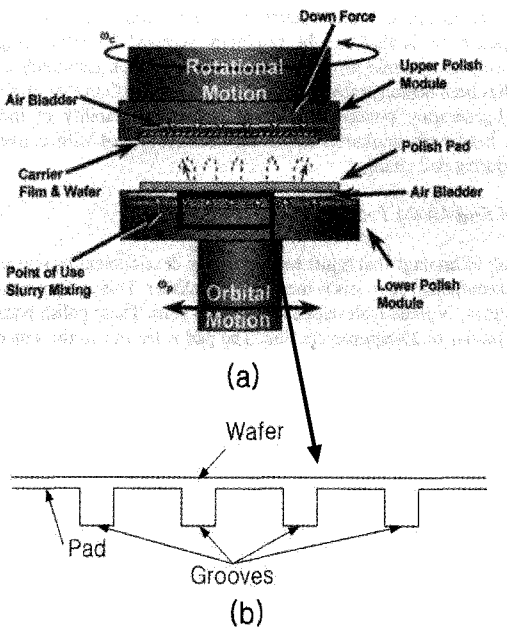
outline of pad groove in CMP: (a) CMP outline (b) pad groove outline
